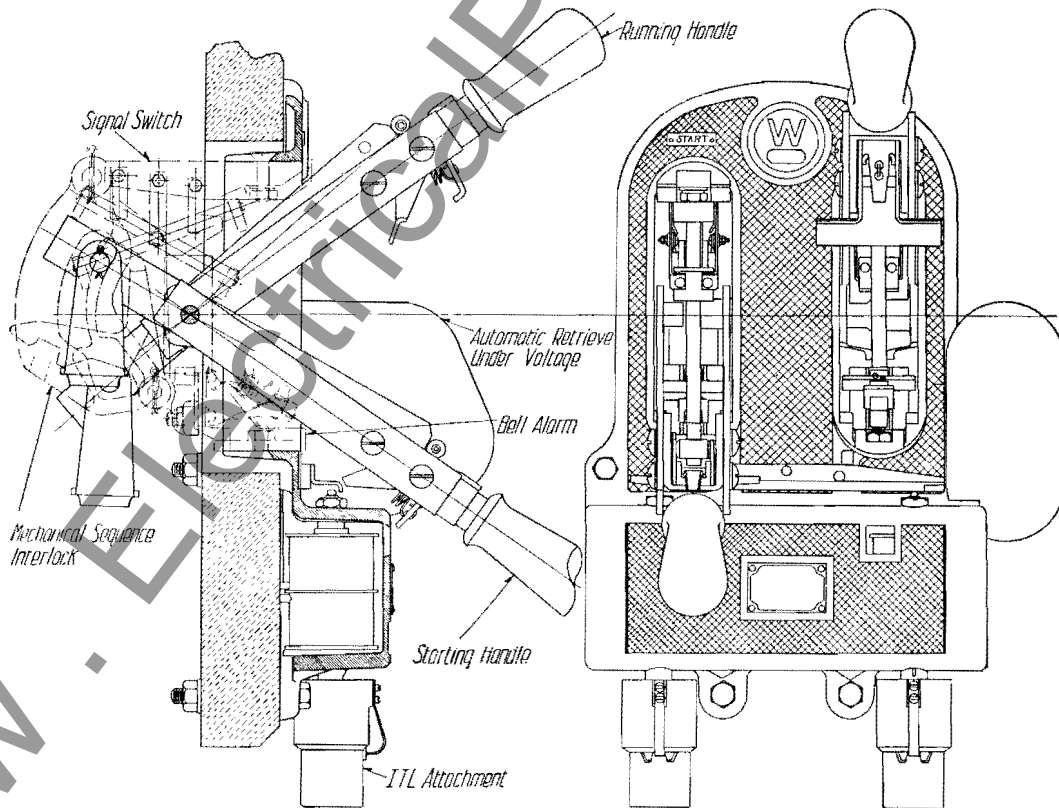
DOUBLE HANDLE, 2-COIL COVERPLATE FOR MOTOR-STARTING EQUIPMENT
